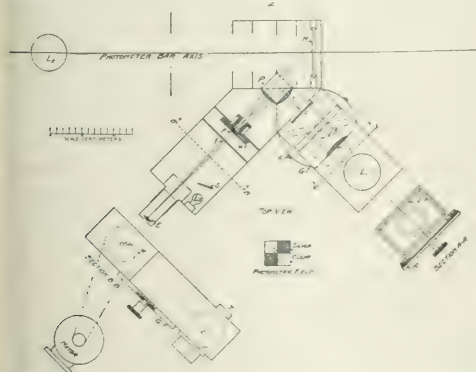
PLAN AND SECTIONS OF FLICKER PHOTOMETER
